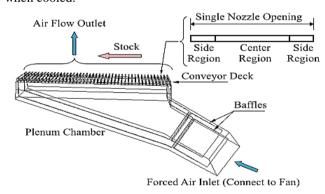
Wire Rod Mill manufacturing line at Tata Steel
